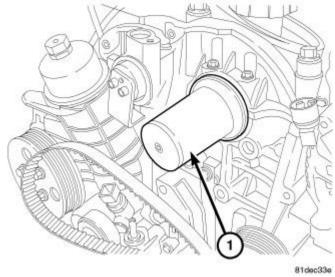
CAMSHAFT OIL SEAL INSTALLATION Courtesy of CHRYSLER LLC
